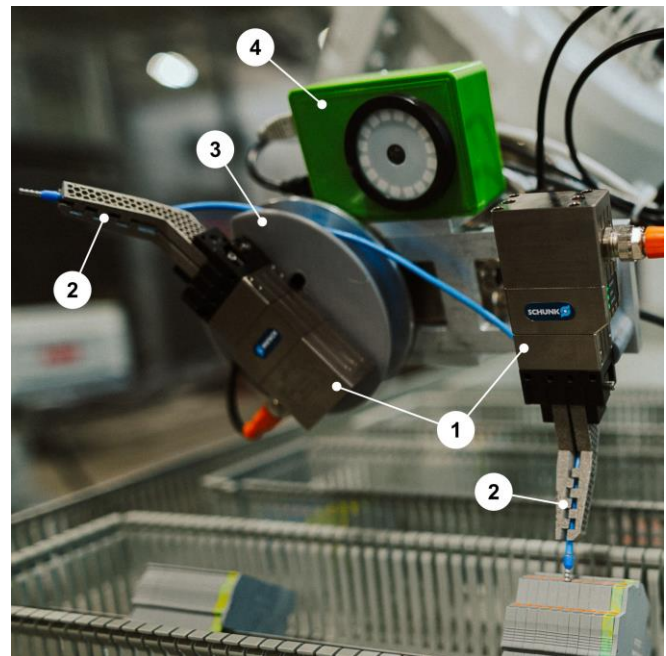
Picture of the tool design that includes two grasping modules (1), fingers with custom-made prismatic jaws (2) and a rotational unit (3) to roll up the wire. Furthermore, a 3D camera (4) is mounted to detect the assembly positions.
